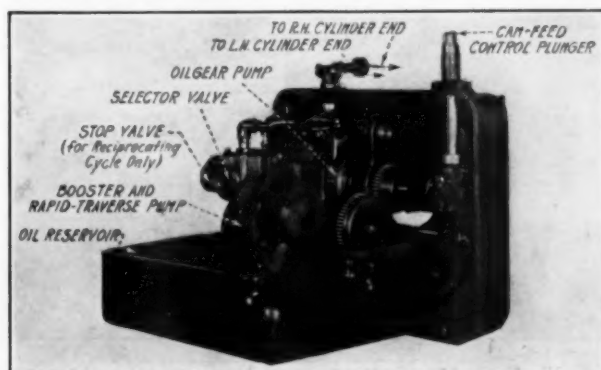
STANDARD HYDRAULIC-FEED UNIT, INSIDE VIEW
